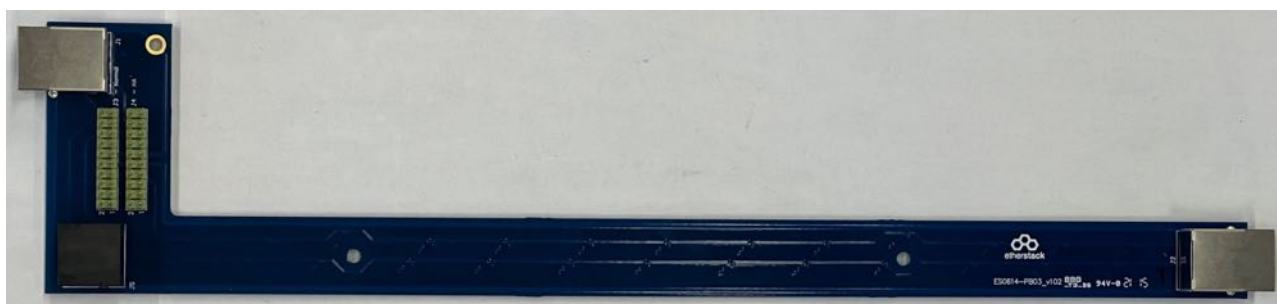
PB03 RJ45 Connector Board Assembly Top View
